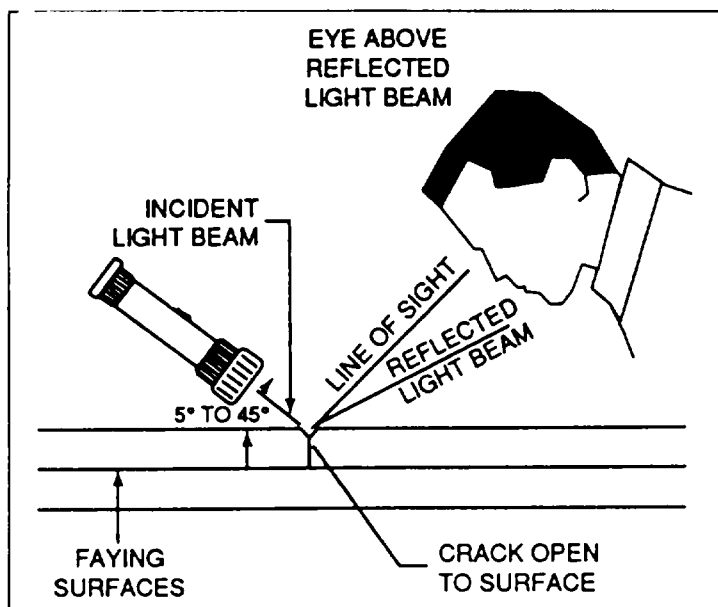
USING A FLASHLIGHT TO INSPECT FOR SURFACE CRACKS
